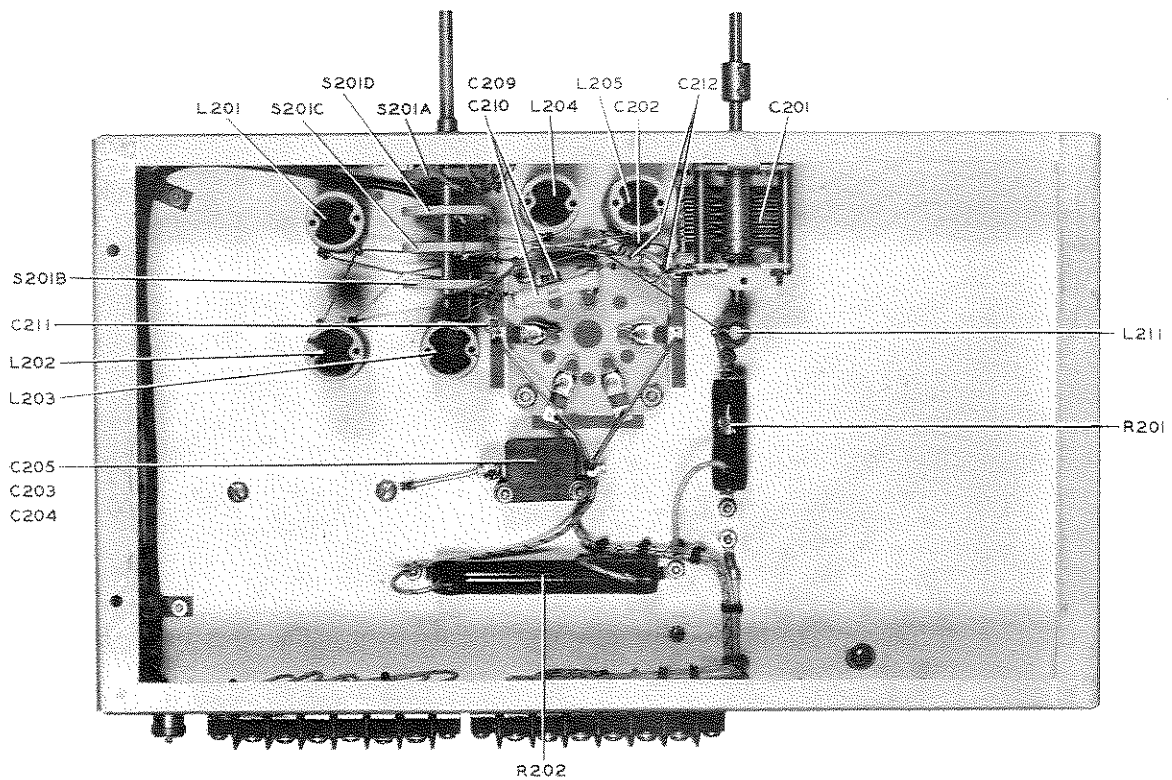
POWER AMPLIFIER TUBE CHASSIS, BOTTOM VIEW
